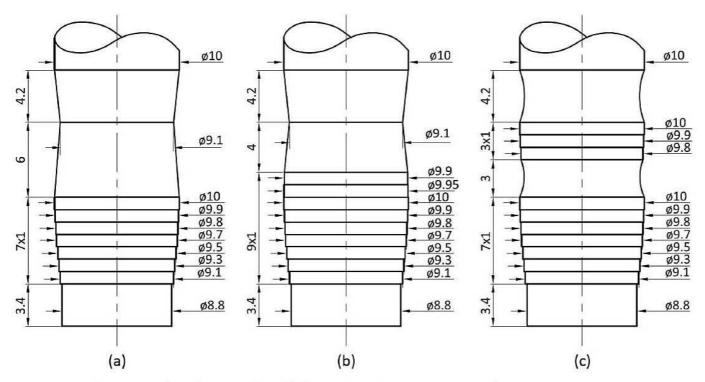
Punch tool geometries (all dimensions in mm): (a) type I; (b) type II; (c) type III
